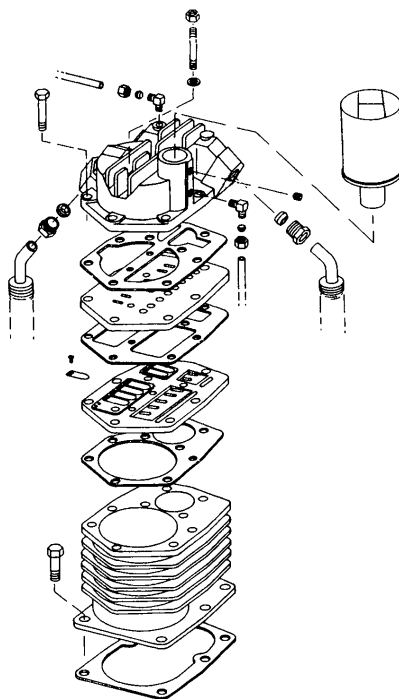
Cylinder, valve and head assembly, showing the reed valve for a tandem, two-stage cylinder arrangement.
